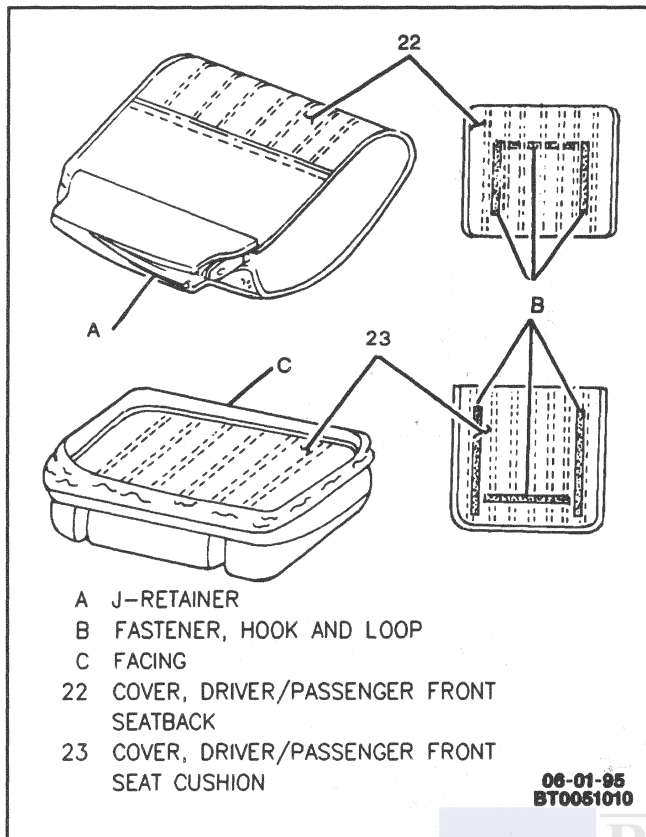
Removing Front Seat and Seatback Covers (Typical)
